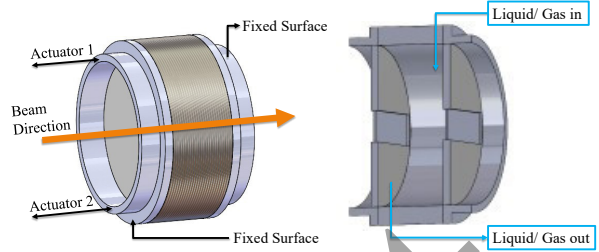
SolidWorks model of the liquid wedge assembly: (a) external view and (b) cross-sectional view. The bellows enables adjustable angle and thickness.
